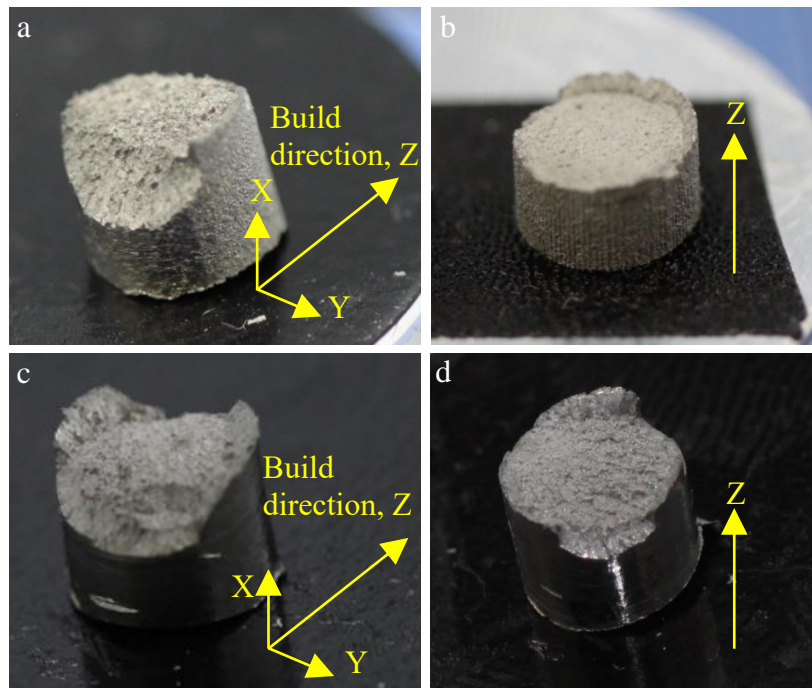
Typical fracture surfaces of (a) as-built horizontal sample, (b) as-built vertical sample, (c) machined horizontal sample and (d) machined vertical sample.
